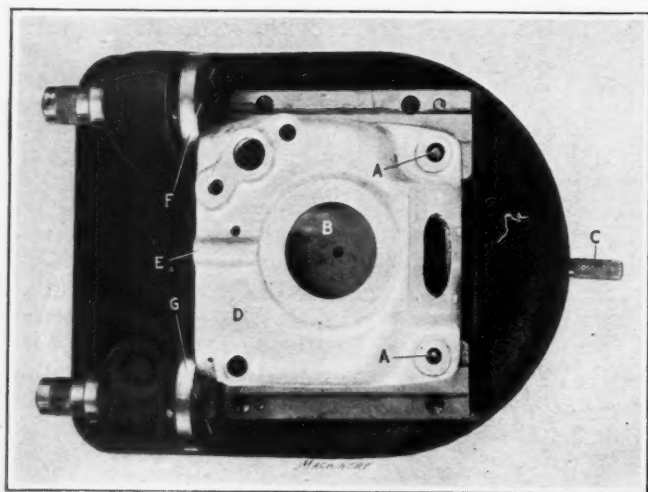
Special Type of Box Gaging Fixture used for inspecting Relation of Bore to Milled Surfaces on an Electric Starter Generator Frame
